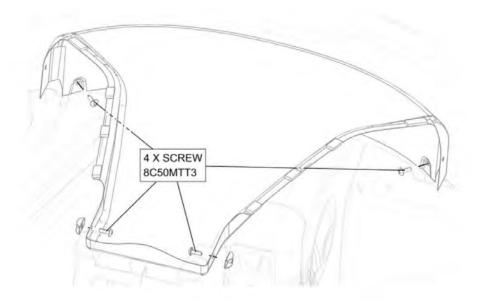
REMOVE CENTER SPINE SCREWS
